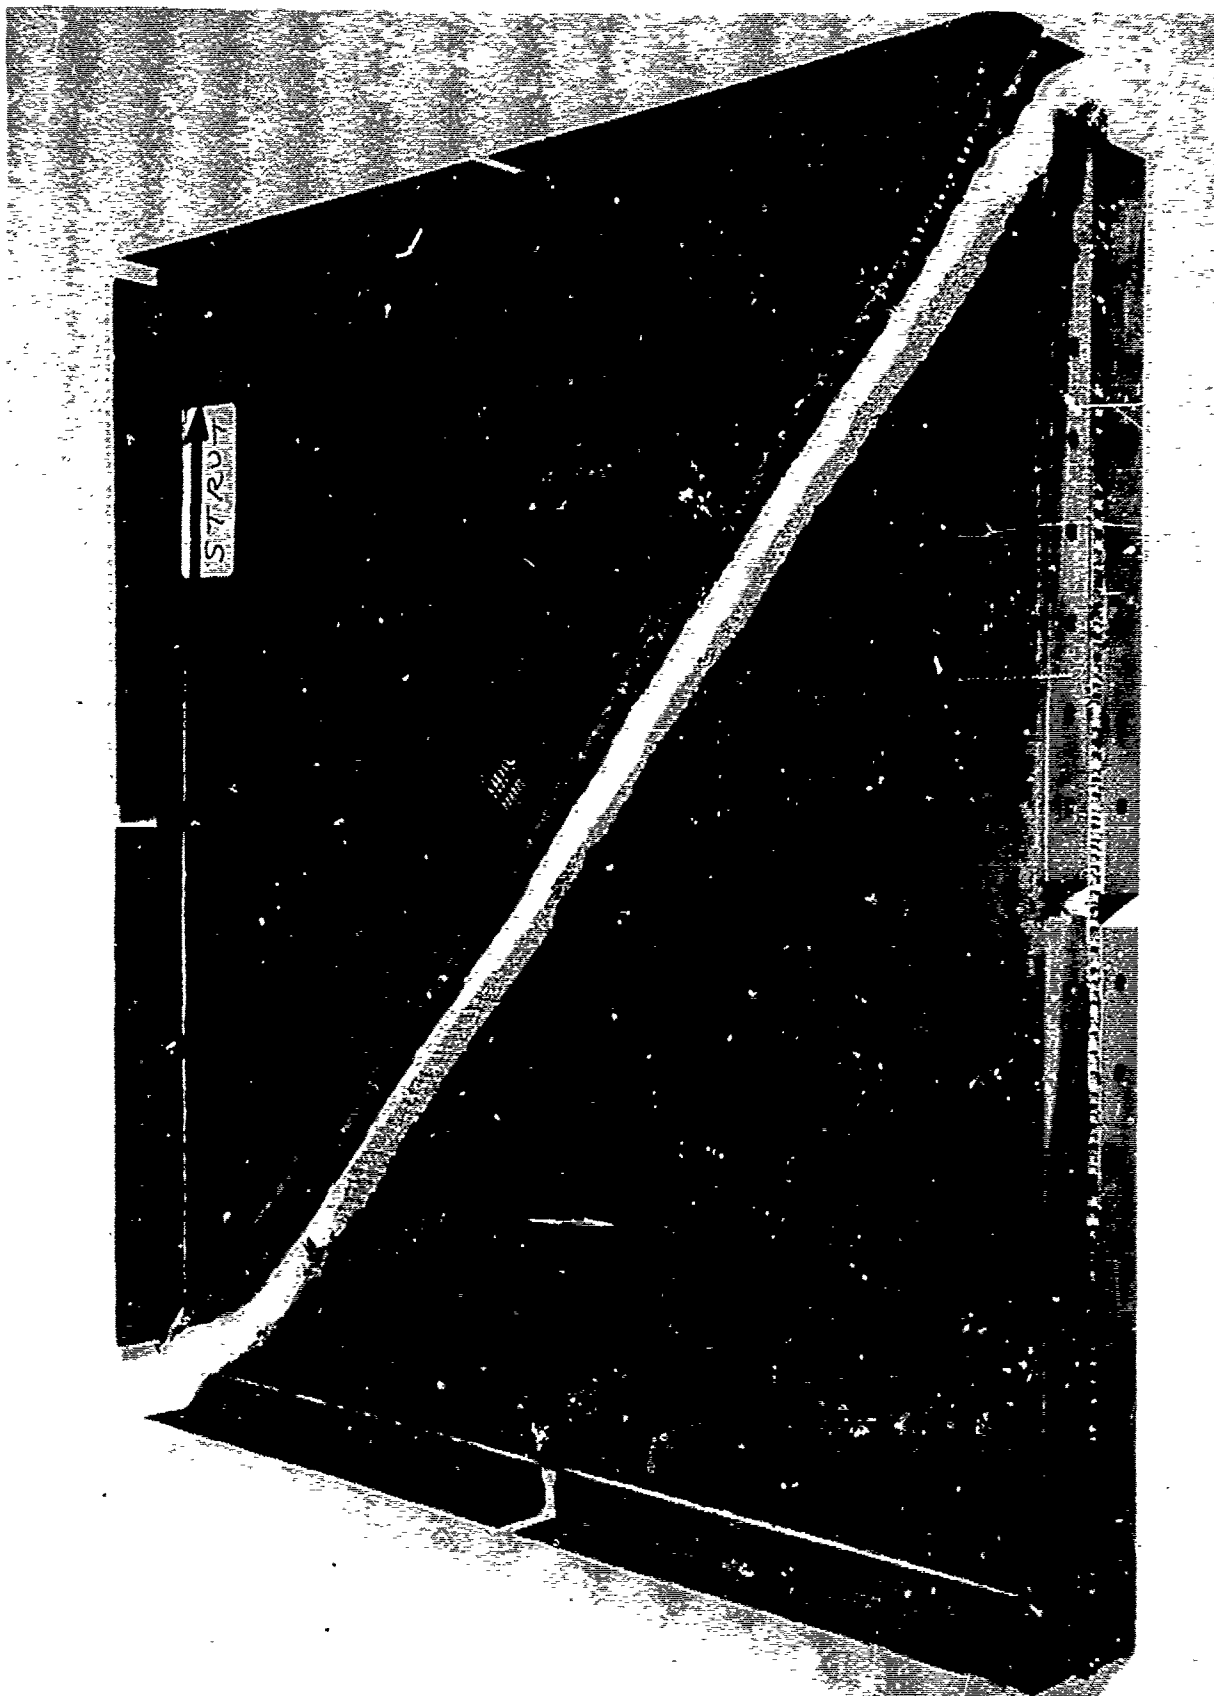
Test Specimen 3B1R2 After Failure, Back Side, Inplane Shear
